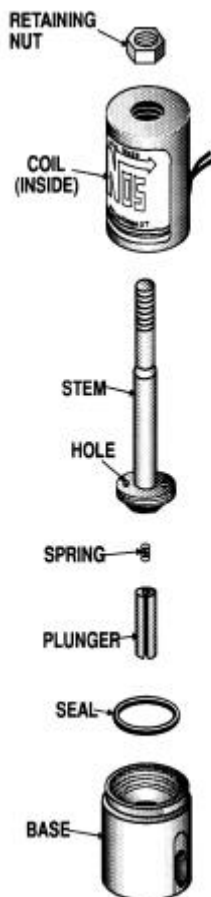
Cheater/Big Shot/Pro Shot Solenoid Exploded View
